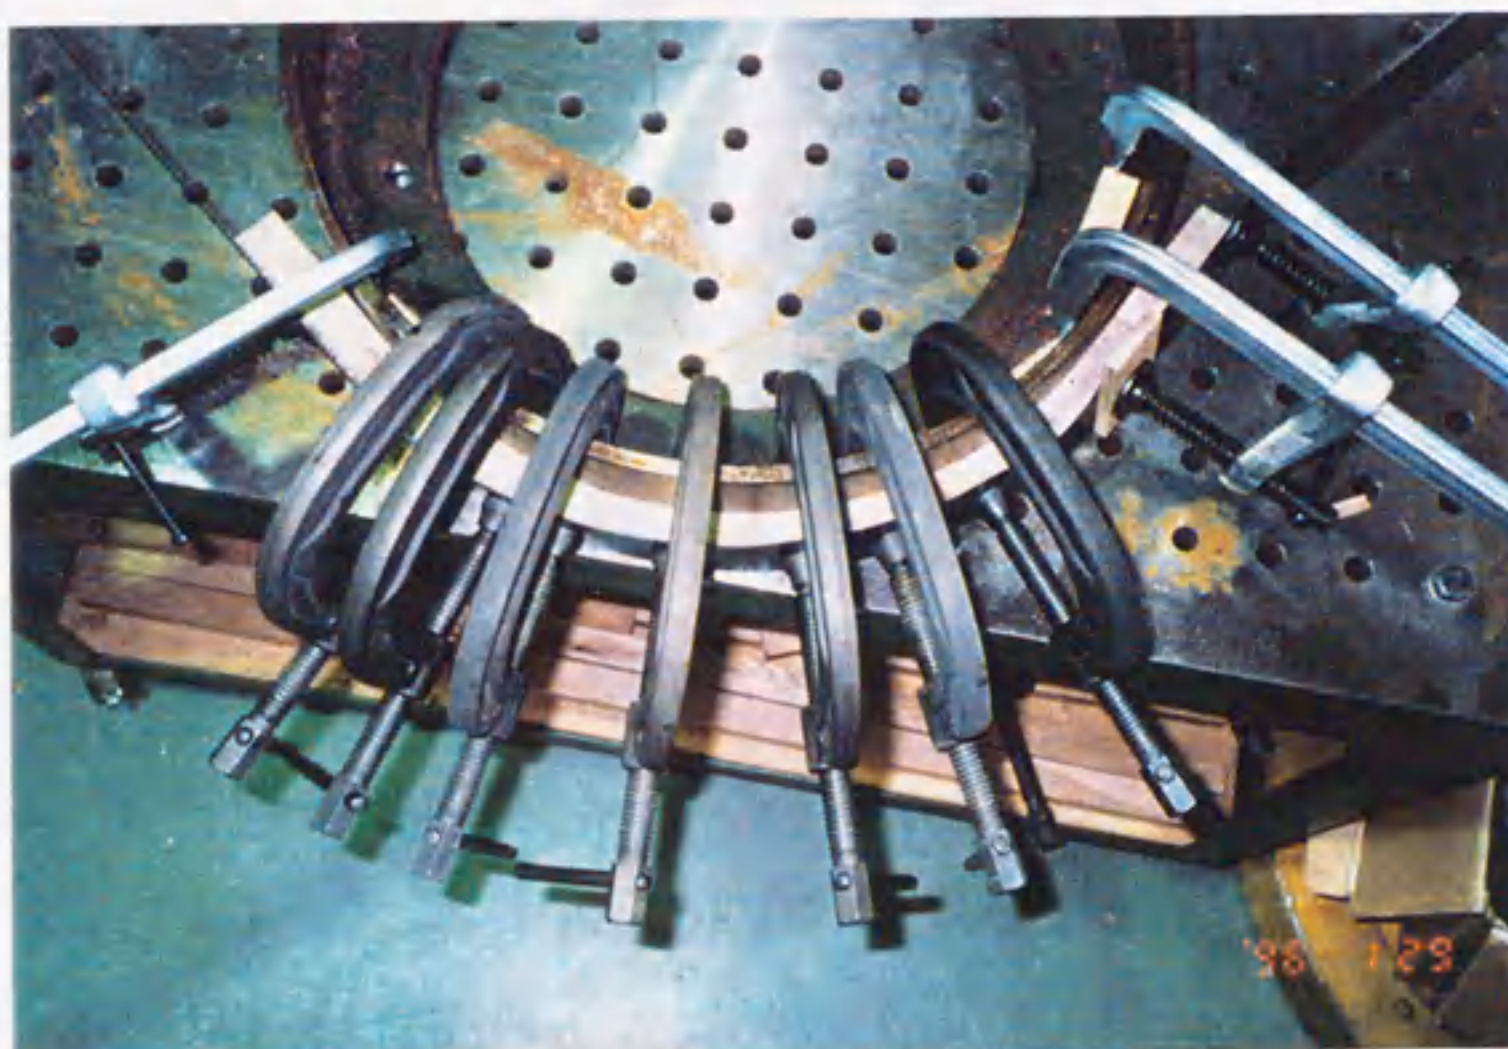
Bending by using the frame ($R=25$ cm) to shape.
